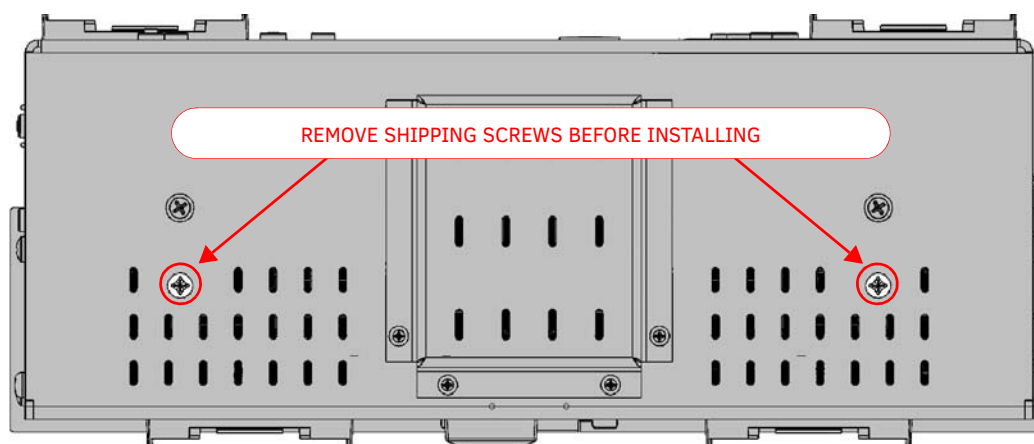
MXR-1001 BOTTOM View - remove shipping screws before installation
